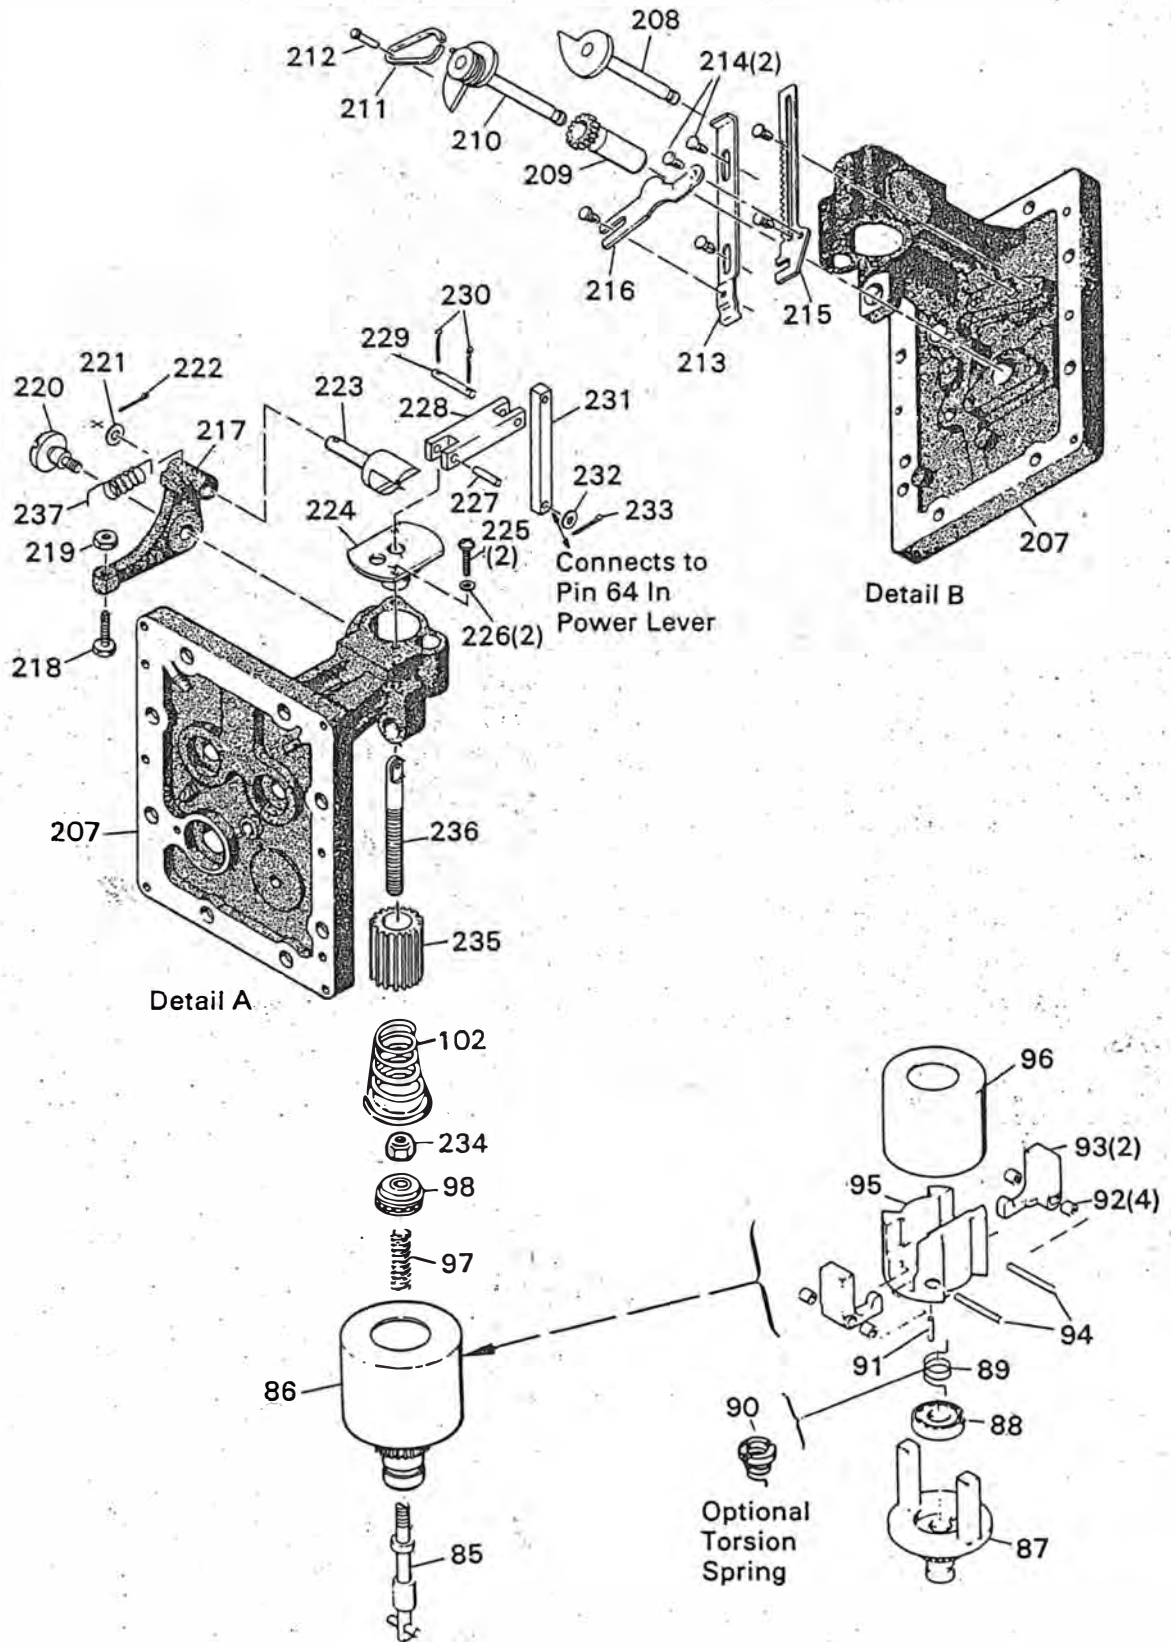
Exploded View of UG8 Dial Governor (Sheet 3 of 4)
